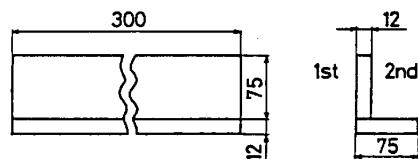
Dimension of horizontal fillet welding specimen
